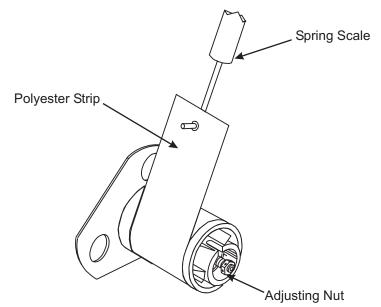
Adjust Tension of Rewind Spindle Assembly
